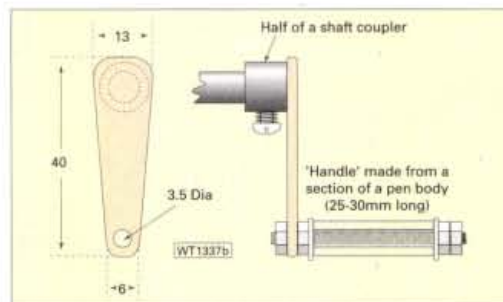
The winding handle is now clamped in the vice and the piece of spindle coupler soldered as before, before filing to shape and fitting a short piece of 4BA studding for the handle which is a section of ball pen casing with lock nuts and washers to secure so it rotates freely (see text).
